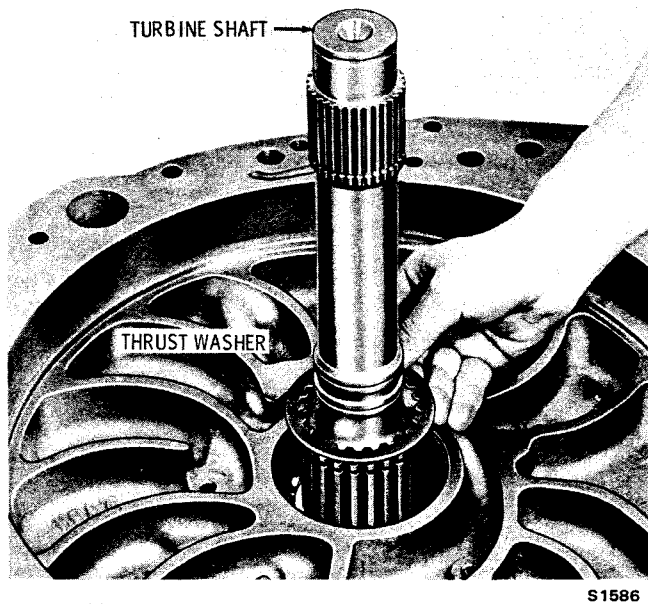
Removing splined thrust washer (CBT, CLBT, VCLBT)
